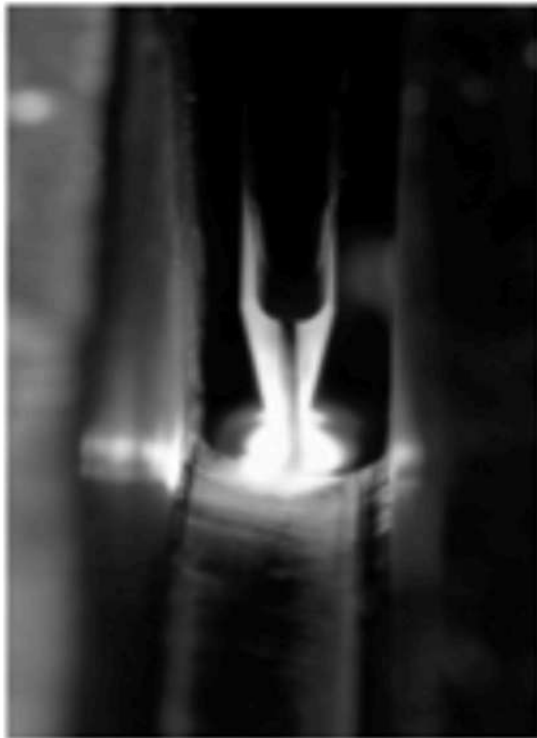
Welding in progress (Courtesy: Polysoude)
